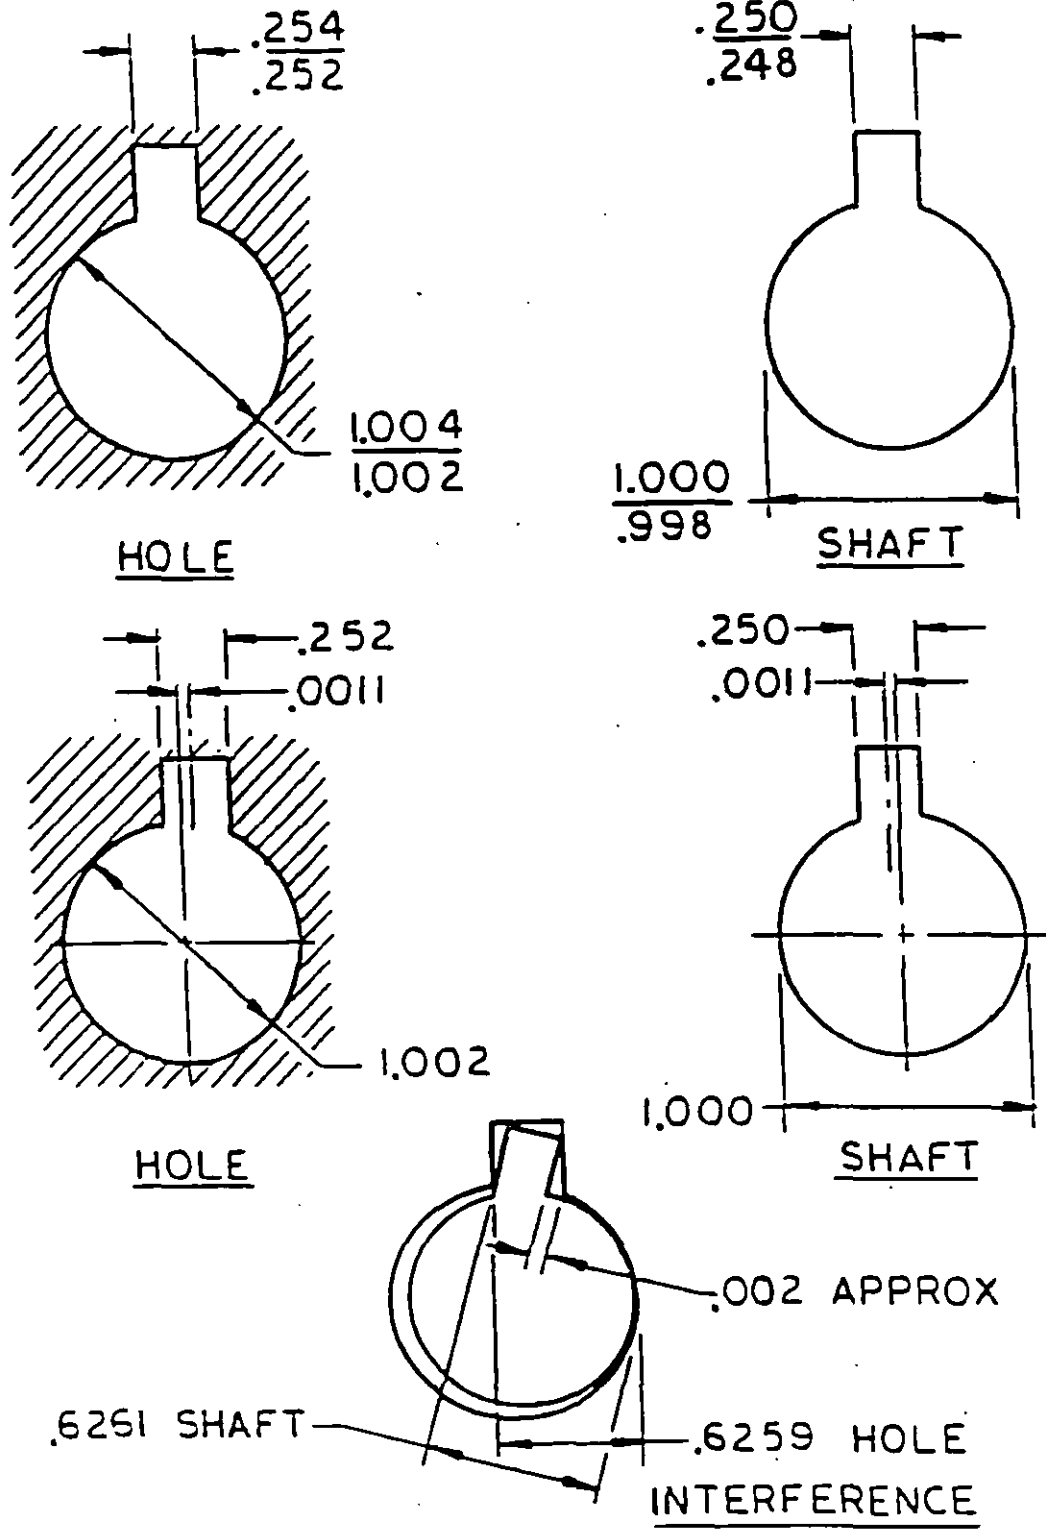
Size and positional tolerances of keyed shaft.
